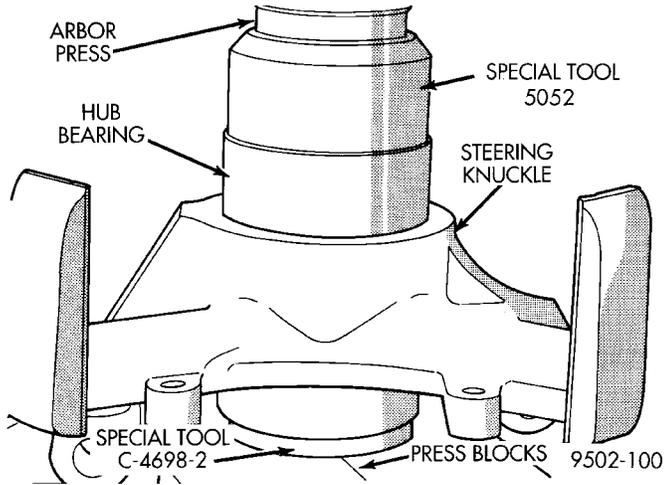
Pressing Hub Bearing Into Steering Knuckle
